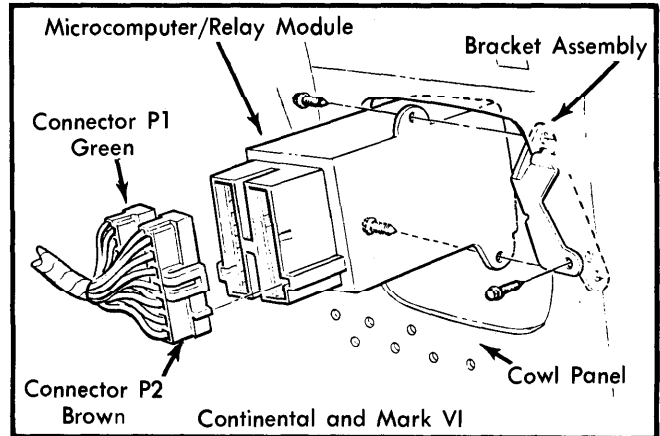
Microcomputer/Relay Module Location Continental, Mark VI
